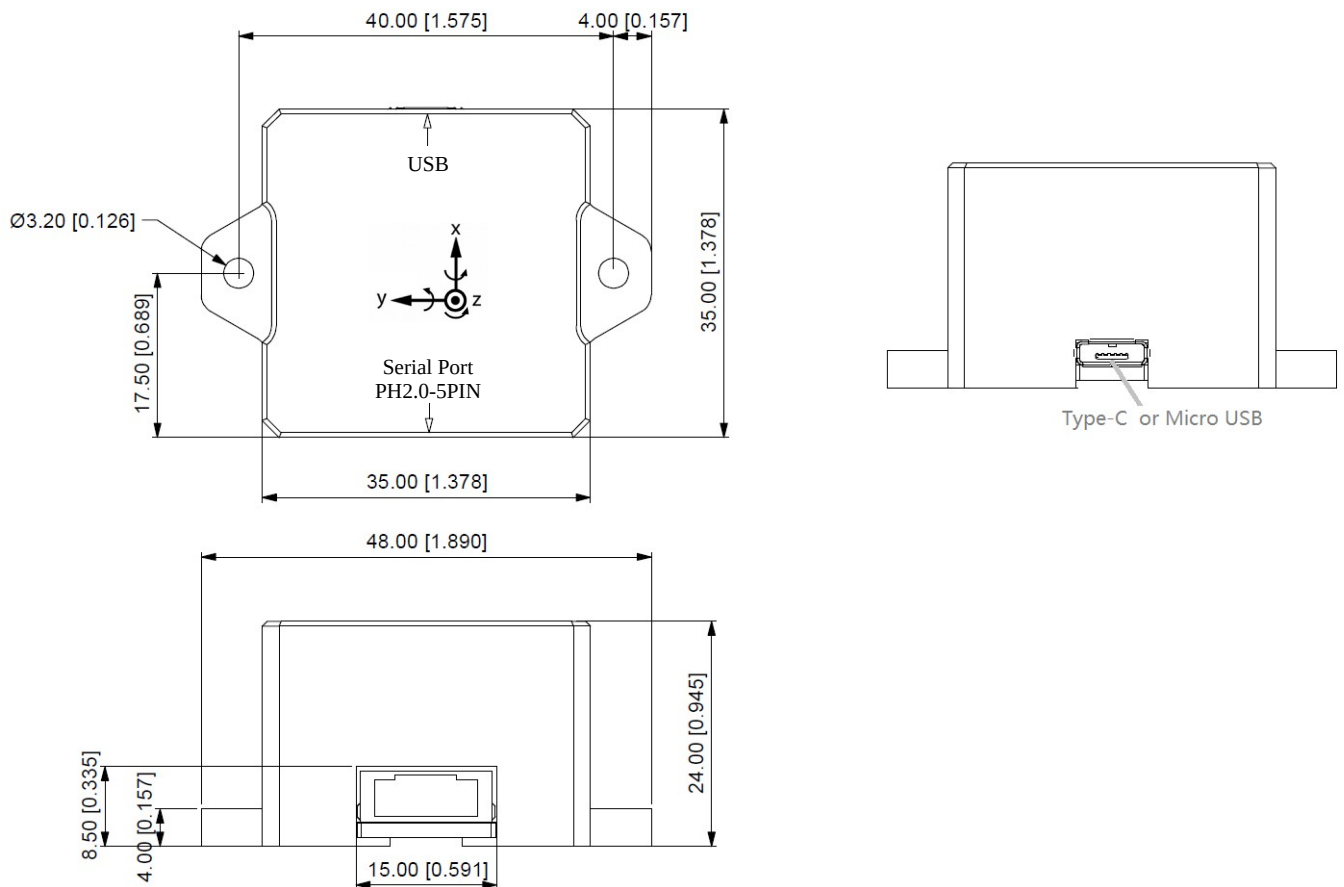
TransducerM TM210 Mechanical Drawing and Axis Definition
